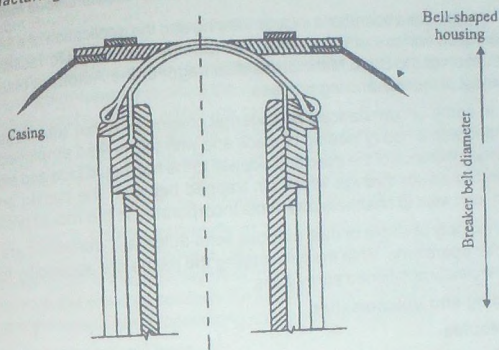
Shaping of tyre casing - the casing is shaped and the belts are positioned for belt assembly
